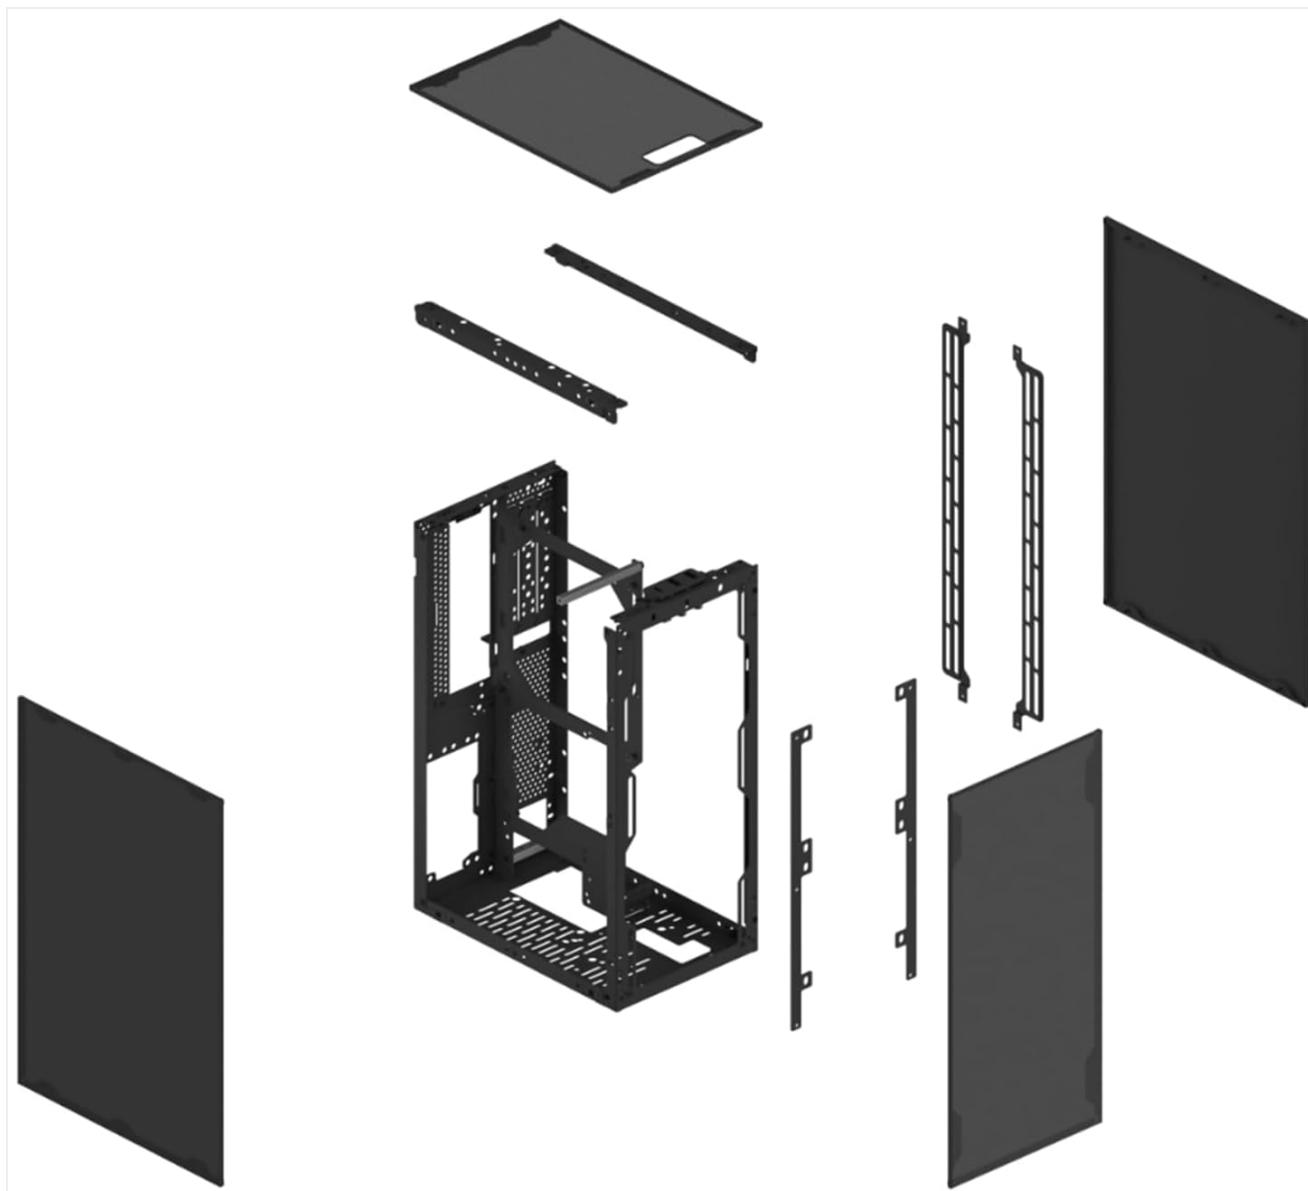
Exploded diagram showing the modular components of the Meshroom S V2, useful for assembly and troubleshooting.
